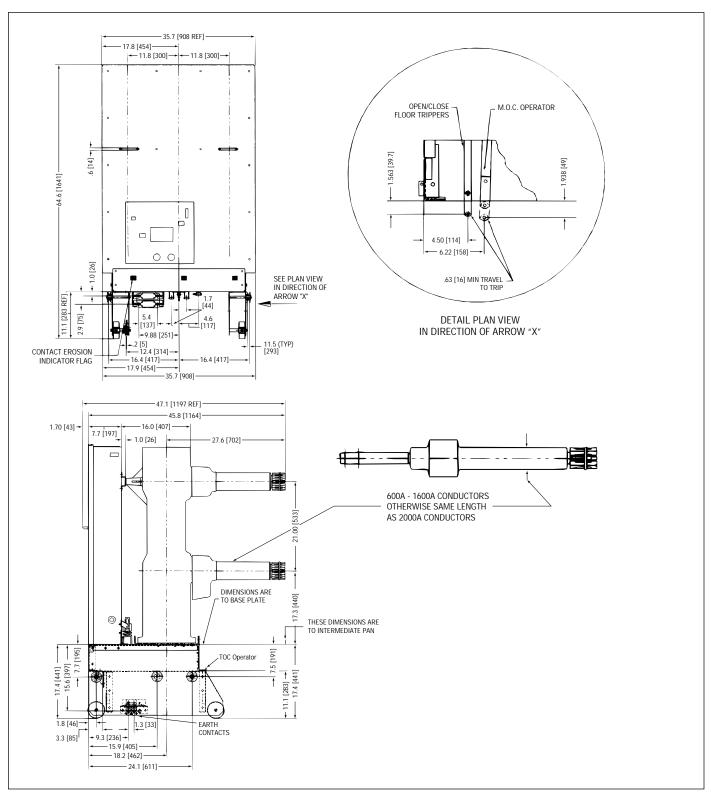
Type VCP-W 38kV Circuit Breaker Outlines and Dimensions (inches and [mm])
